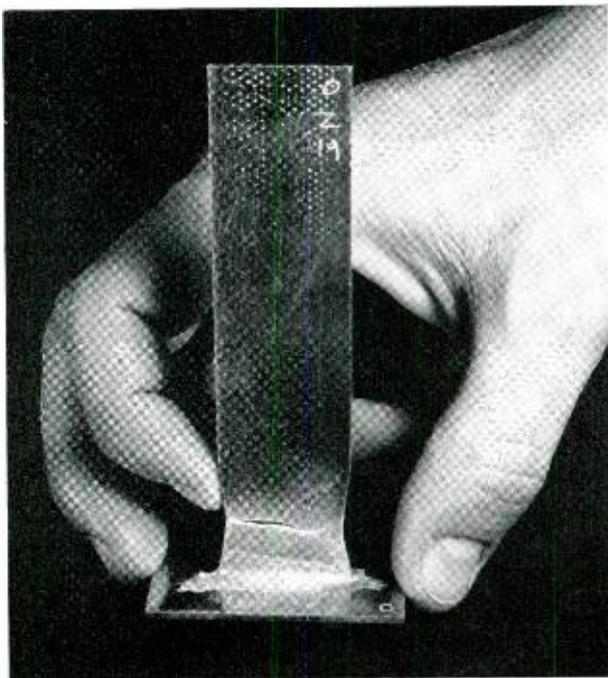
A tensile test of this "T" joint proved the strength of the soldered joint to be greater than that of the aluminum stock, as shown by the failure.
